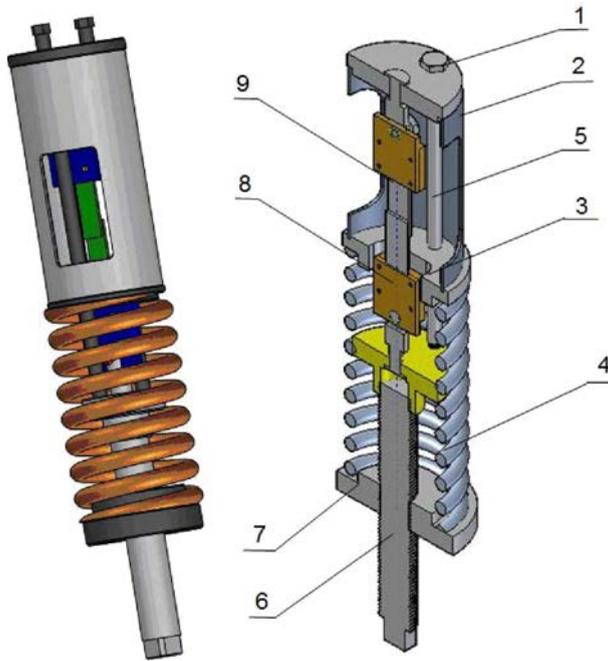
The device used to determine static long-term strength of adhesive joints: 1, 3 – covers; 2 – spacing sleeve; 4 – spring; 5 – lock screws; 6 – screw tightening the spring; 7 – resistance sleeve; 8, 10 – grips for specimen mounting; 9 – tested specimen [13].
